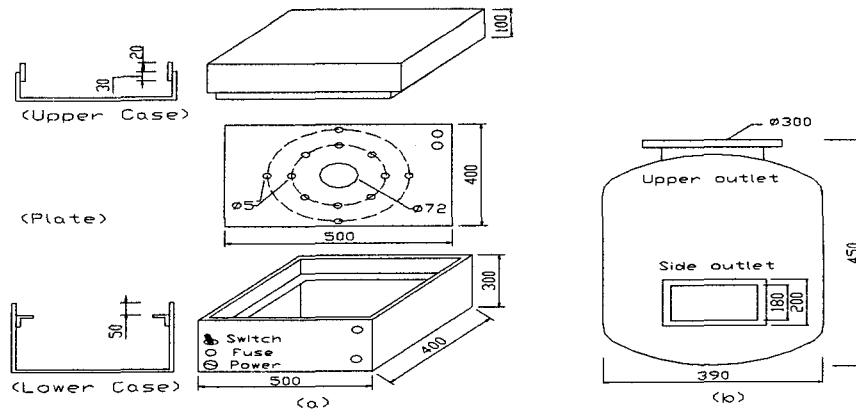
Shape and dimension of the case (a) and the pressure vessel (b)
